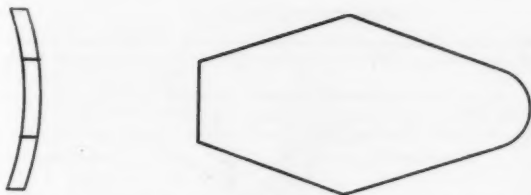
Tongue, shown actual size. Aluminum 0.125 in. thick.
